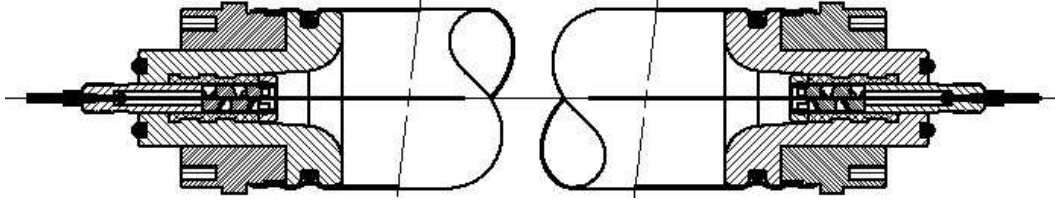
Schematic view of the cross section of a drift tube with its end-plugs that hold the wire.
